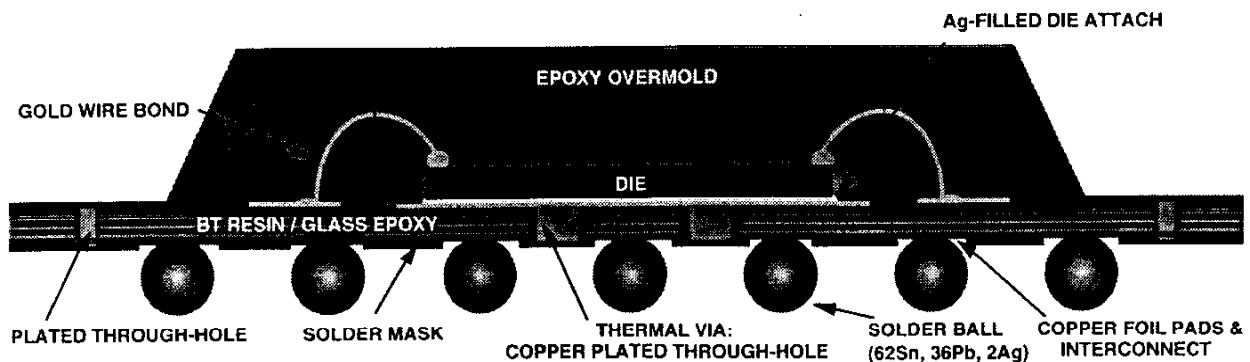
Typical Plastic BGA Cross-Sectional View
